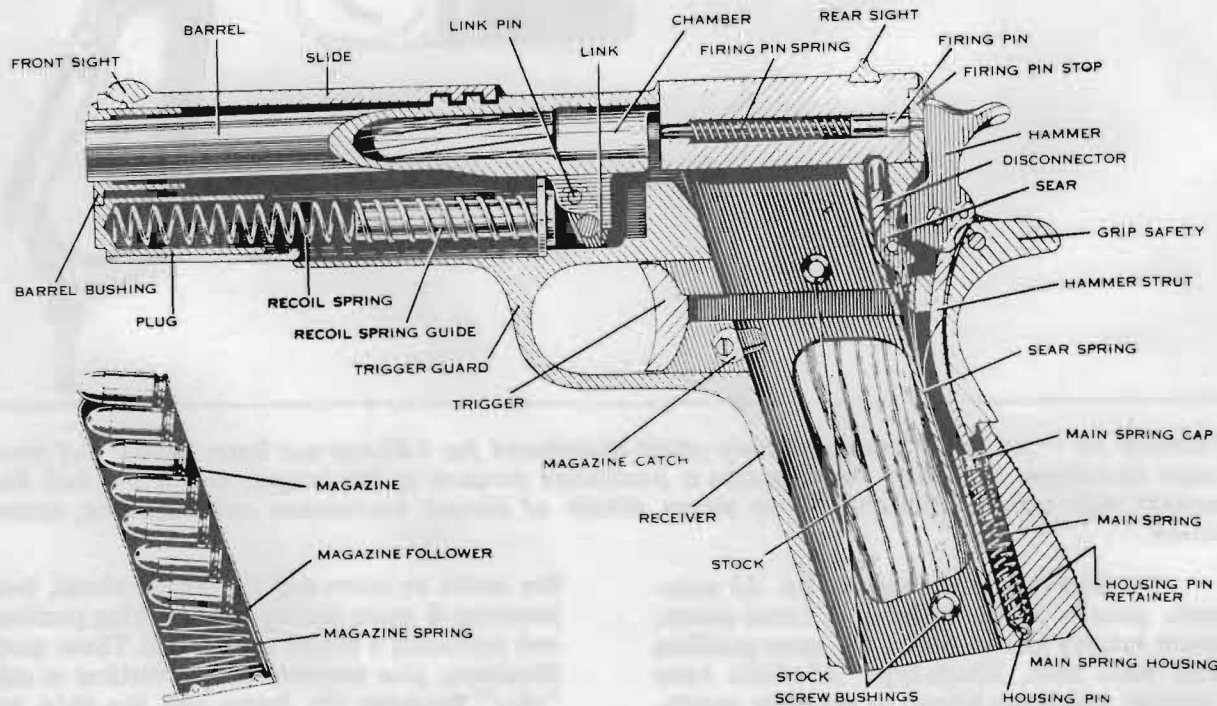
Famous Colt 1911A1 pistol, which had the longest service life of any military handgun. Sectioned drawing shows component parts.
